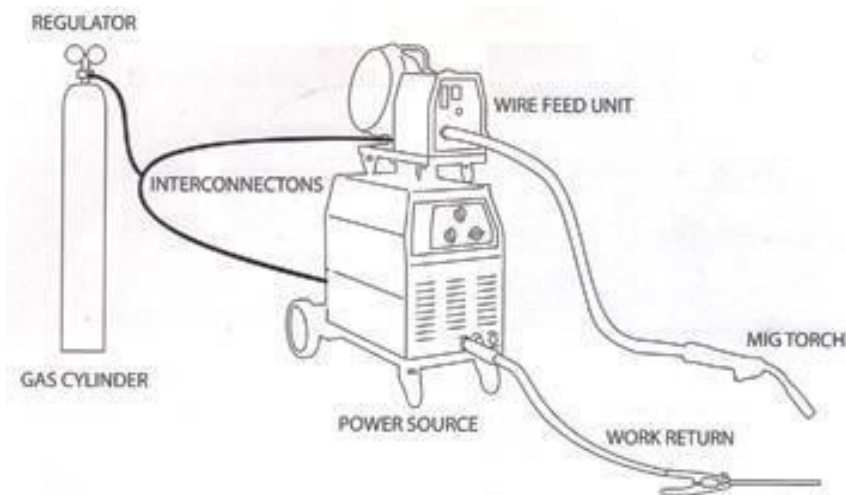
Schematic diagram of CMT welding machine.
